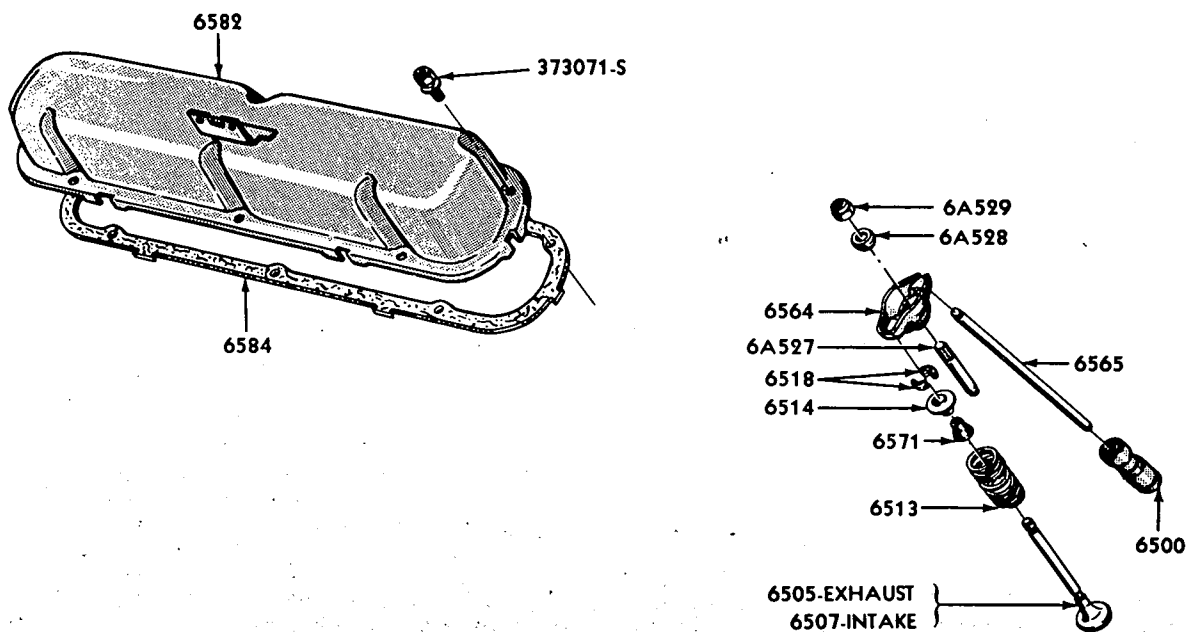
VALVES, PUSH RODS, ROCKER ARM COVER AND RELATED PARTS (TYPICAL).
